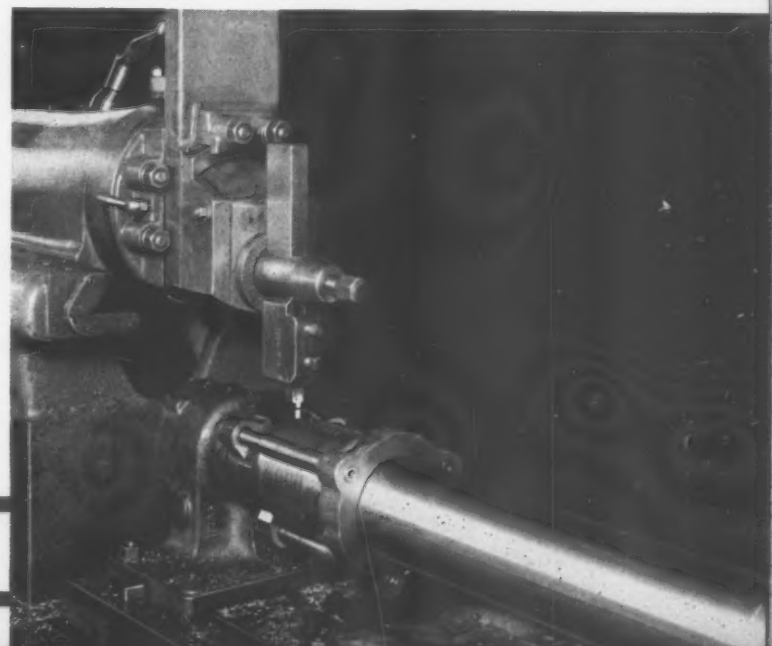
Bertram Shaper Used for Cutting away Portions of the Thread on the Breech End of the Barrel to Permit Quick Assembly of the Barrel to the Breech Ring
